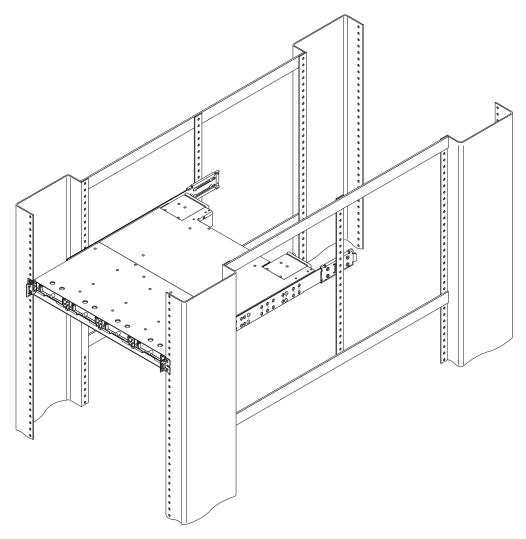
Rackmounted Cabinet Array Using Middle Brackets With Chassis Ears and Bezels Removed, After Installation
